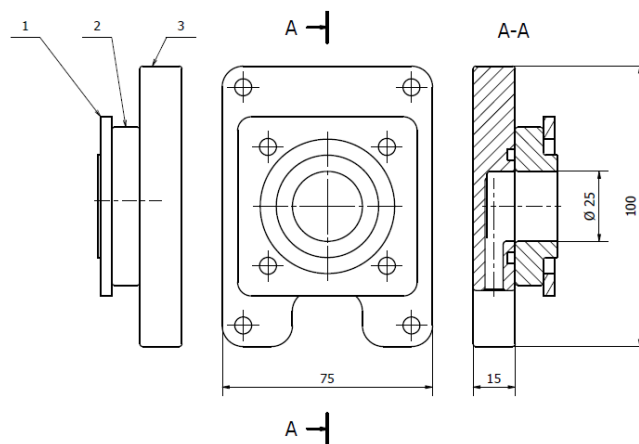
Technical drawing of mechanical stimulation device housing. The illustration presents three views of the device component: a side view (left), a front view (center), and a section view (right) along the A–A axis. Mounting apertures and a central recess of 25 mm diameter are included in the design for customized use in cell culture applications. Dimensions are in millimeters.
